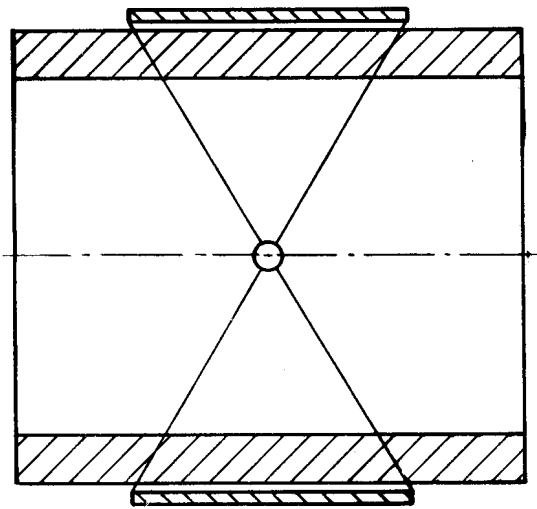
ARRANGEMENT I, SINGLE WALL PENETRATION OBJECTS WITH PLANE WALLS
